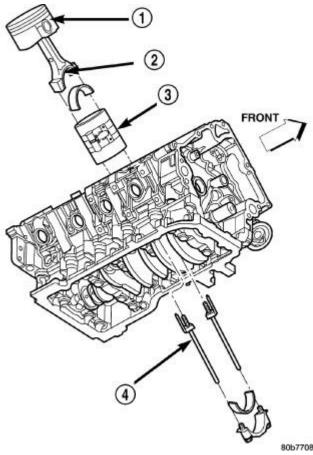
Identifying Piston Components Courtesy of CHRYSLER LLC
